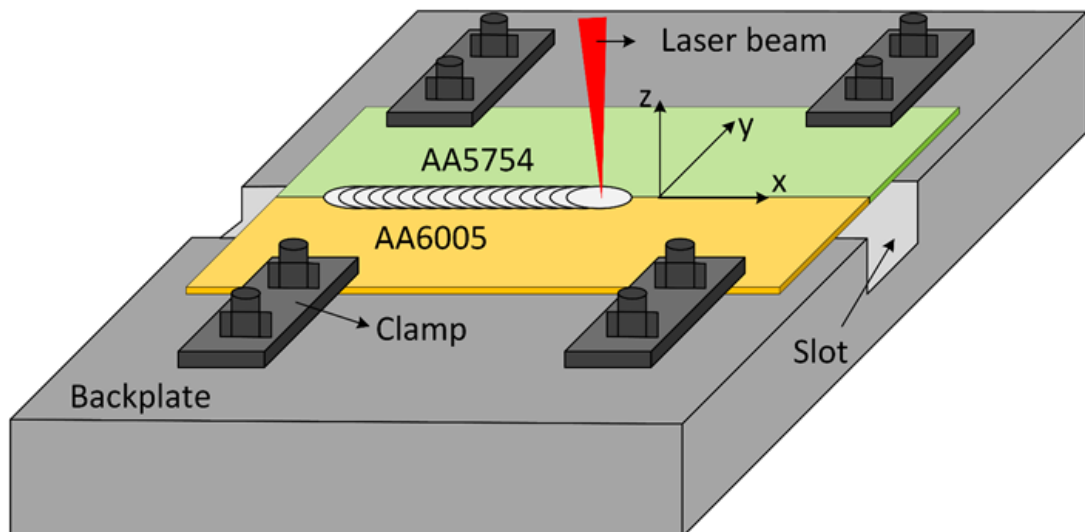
Schematic representation of the joint configuration and clamps for butt laser welding.
